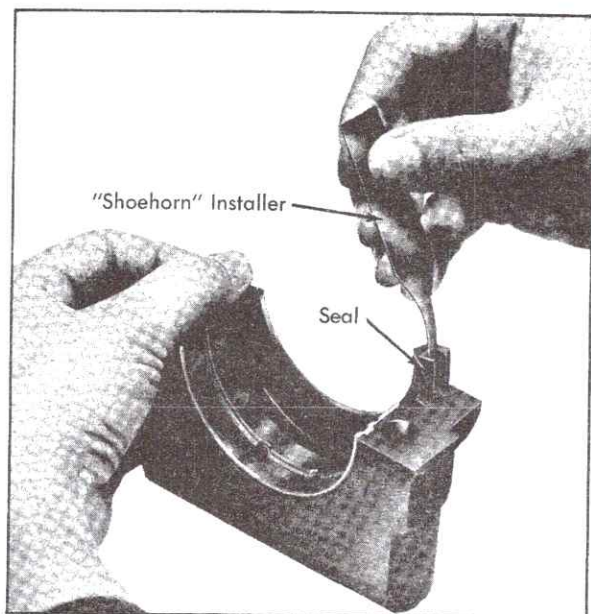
Rear Main Bearing Oil Seal Installation
